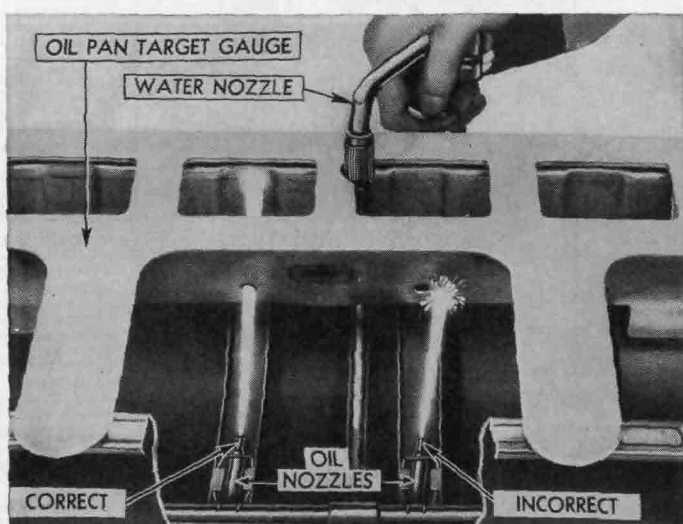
Aim of oil nozzles checked with special gauge and water nozzle. (Chevrolet Motor Division of General Motors Corporation)
